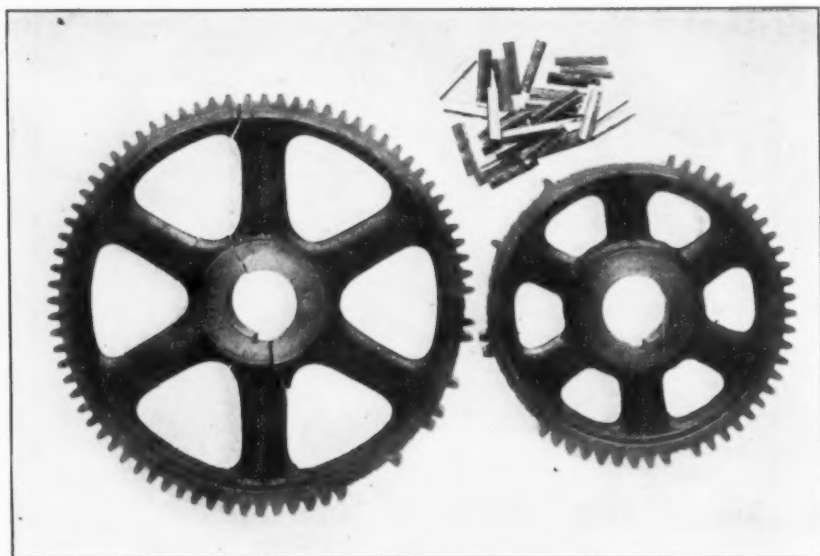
60 TOOTH ENGAGING 80 TOOTH, TEST 014, SERIES 1
